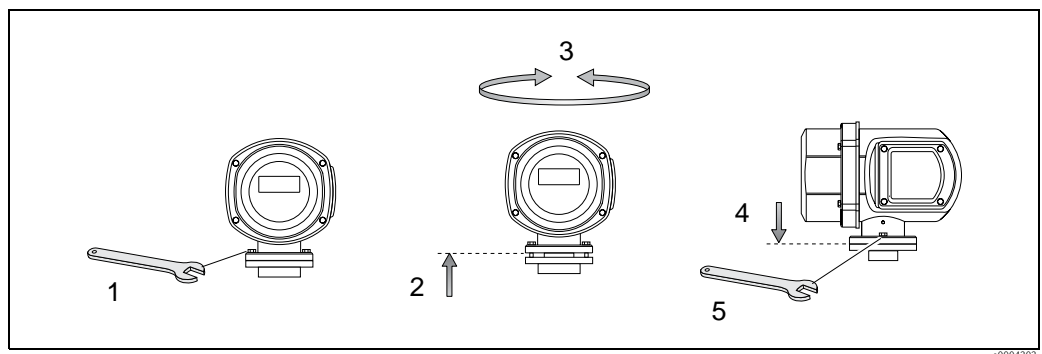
Turning the transmitter housing (stainless-steel field housing)
